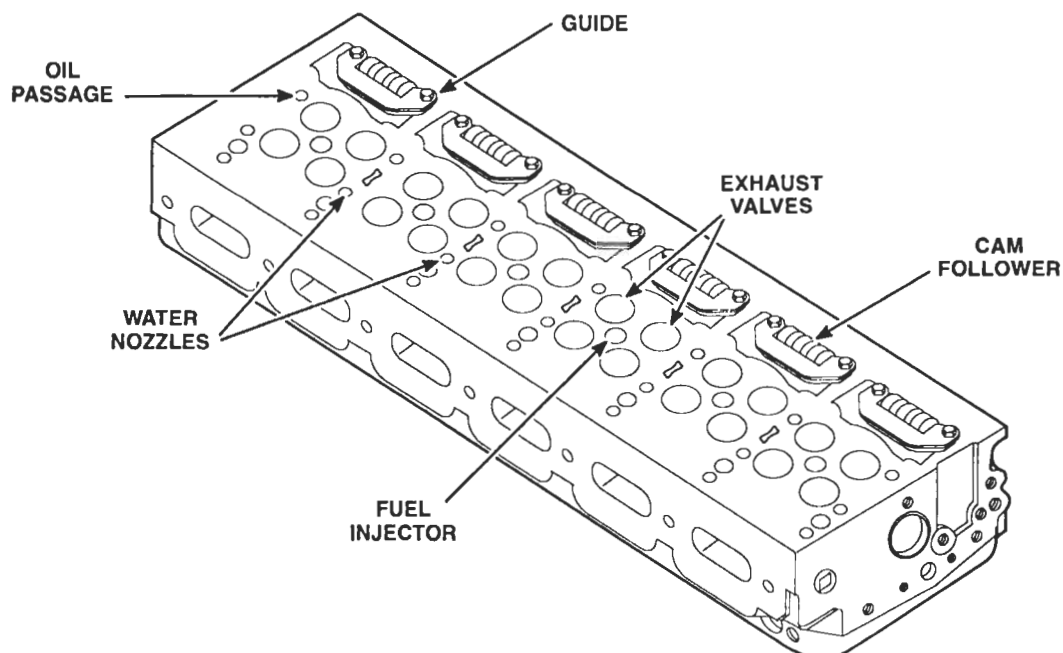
Typical Four-Valve Cylinder Head (Bottom View)
